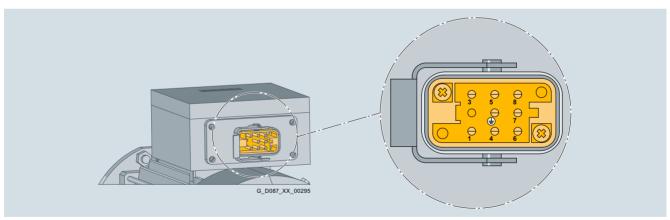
/24 HAN Q8 motor plug with pin assignments for motor frame sizes 80 to 132
